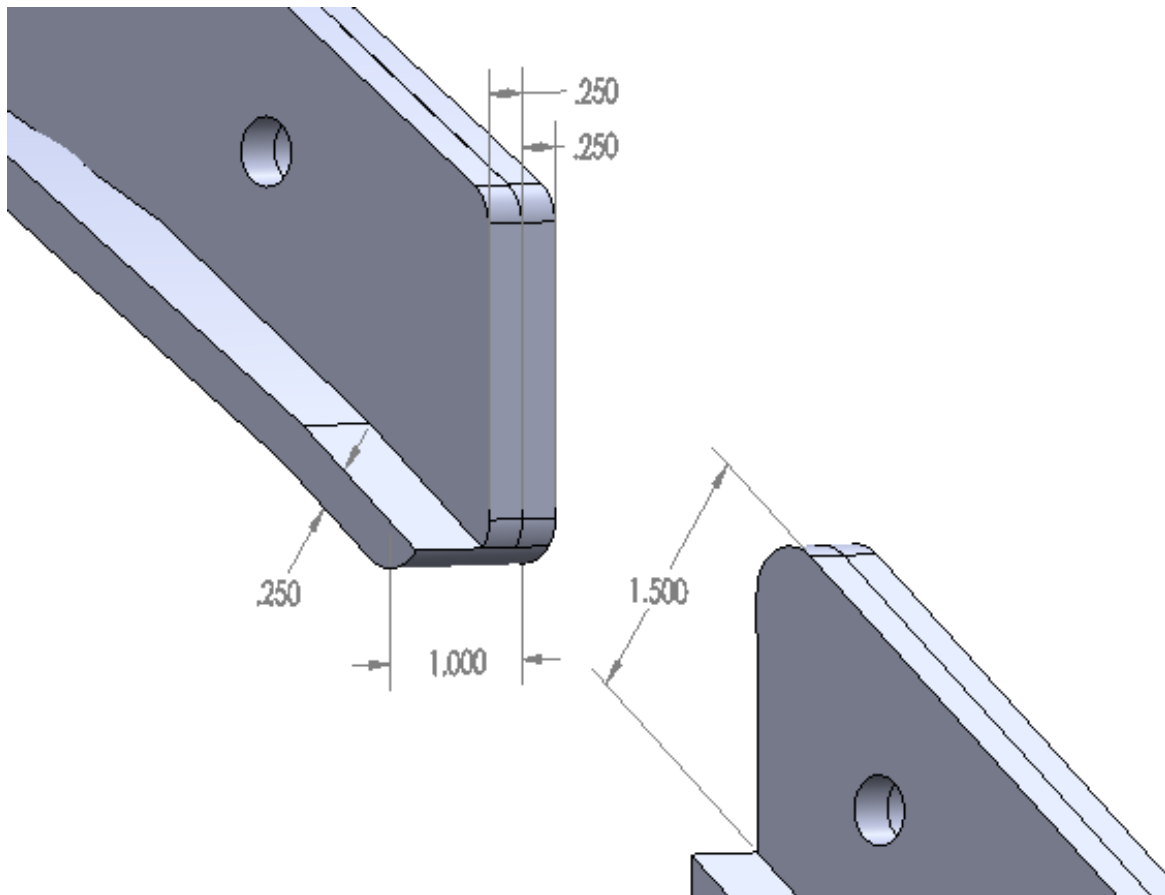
DIMENSIONS ON THE LASER CUT AND WRAPPED PIECES OF THE TRACK, SHOWN AT THE GAP BETWEEN THE LEFT INNER AND RIGHT INNER SECTION.
